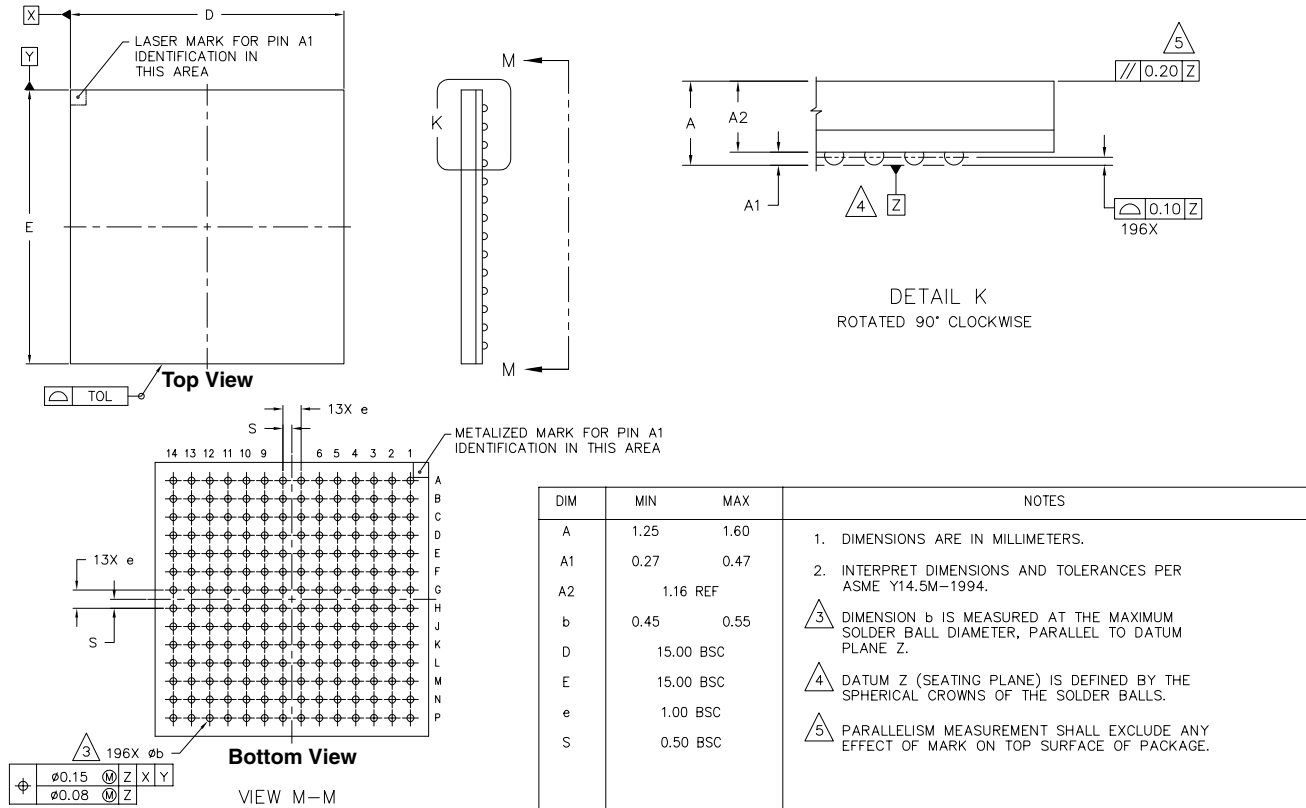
MCF5208CVM166 Package Dimensions (196 MAPBGA)
